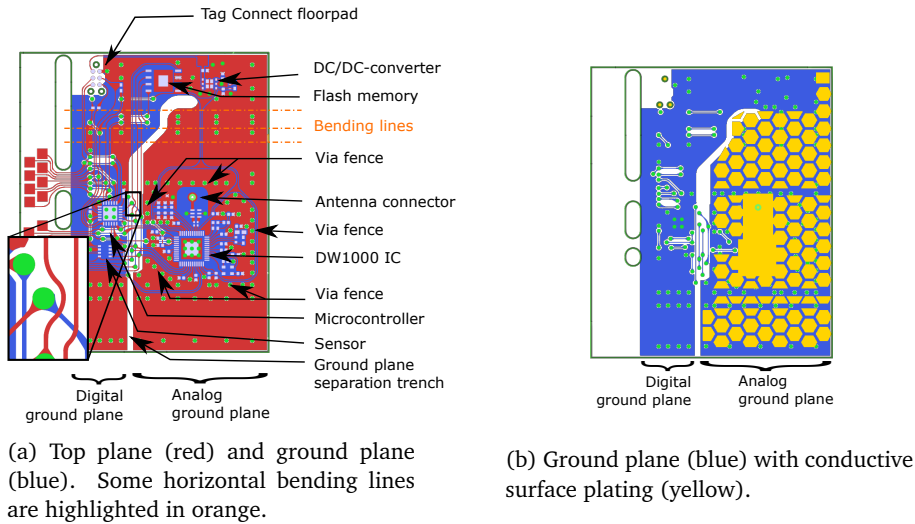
Layout of the Printed Circuit Board (PCB), top view.
